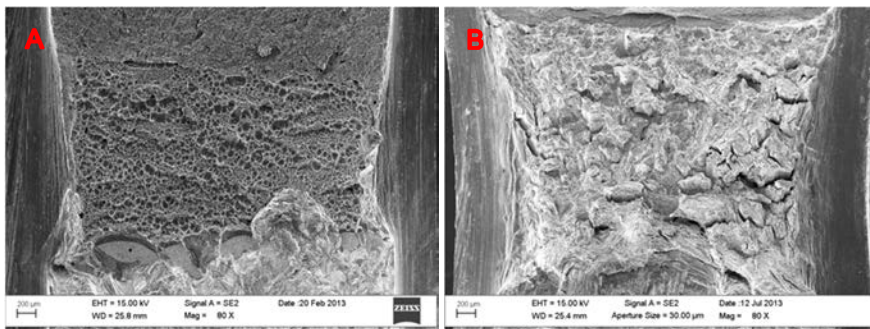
Typical fracture surface structures found from the Alloy 52 NG-DMW fusion line specimens.
